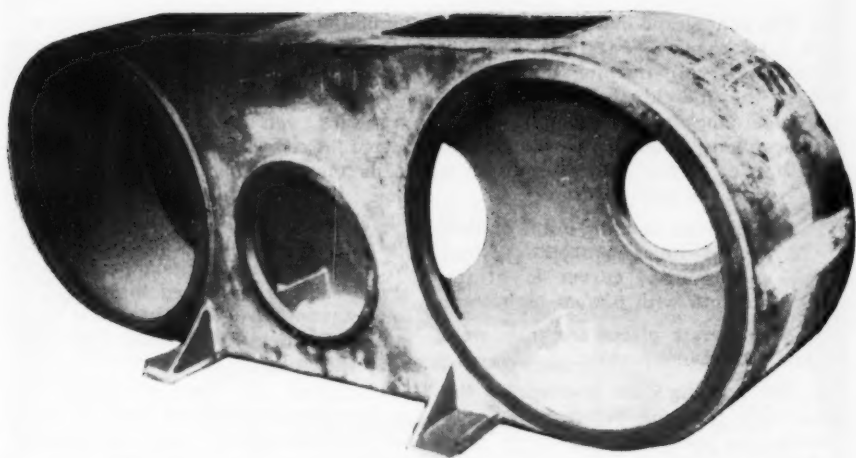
View of the housing case. The unit is $81\frac{1}{4}$ " long, $15\frac{1}{2}$ " wide, 30" high. (These figures are approximate). About 150' total weld is used on each housing
